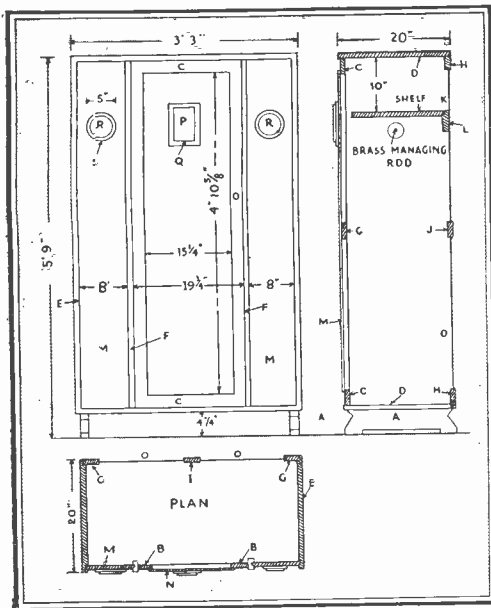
Front elevation, plan, and sectional end view of the wardrobe.
